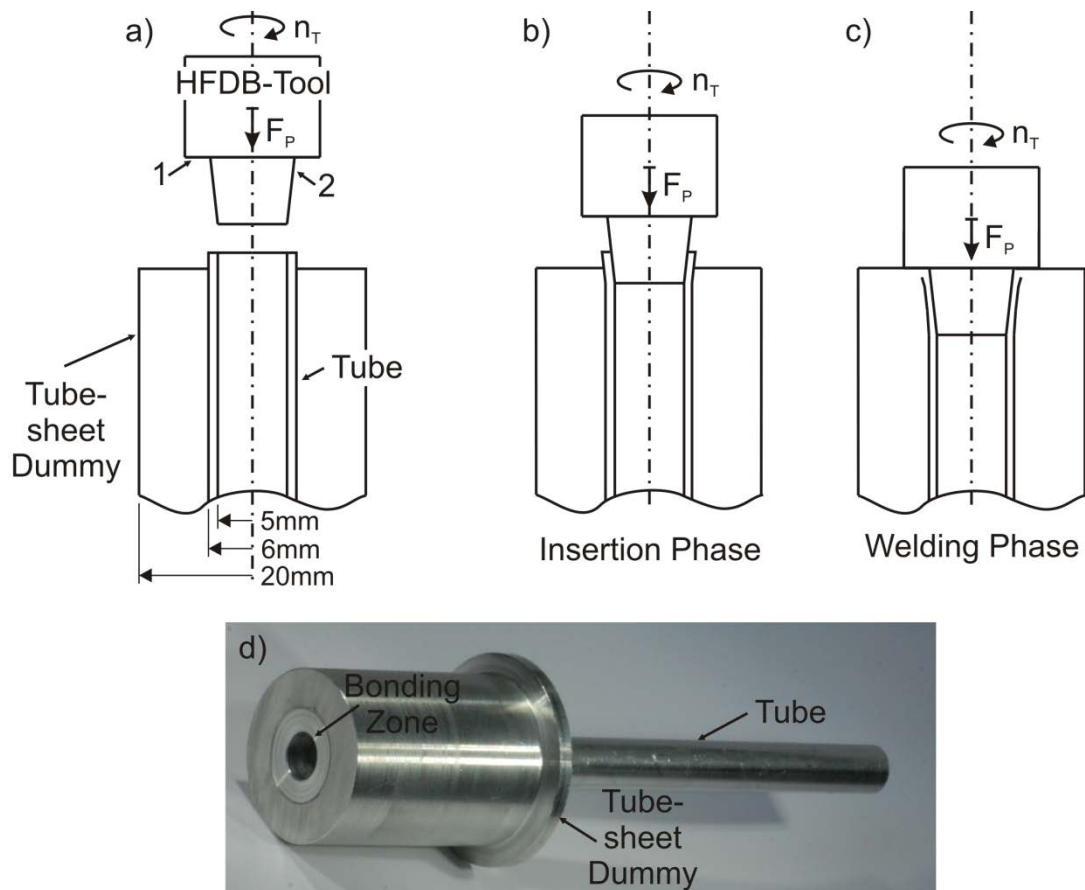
a) Schematic overview of the HFDB tool and workpieces with (1) a friction surface and (2) a conical part; and HFDB process phases: insertion
